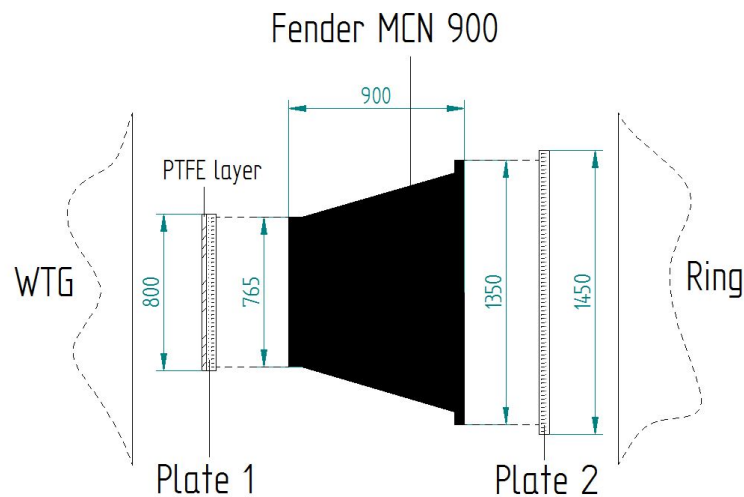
Fender MCN 900 - dimensions and contact surfaces
